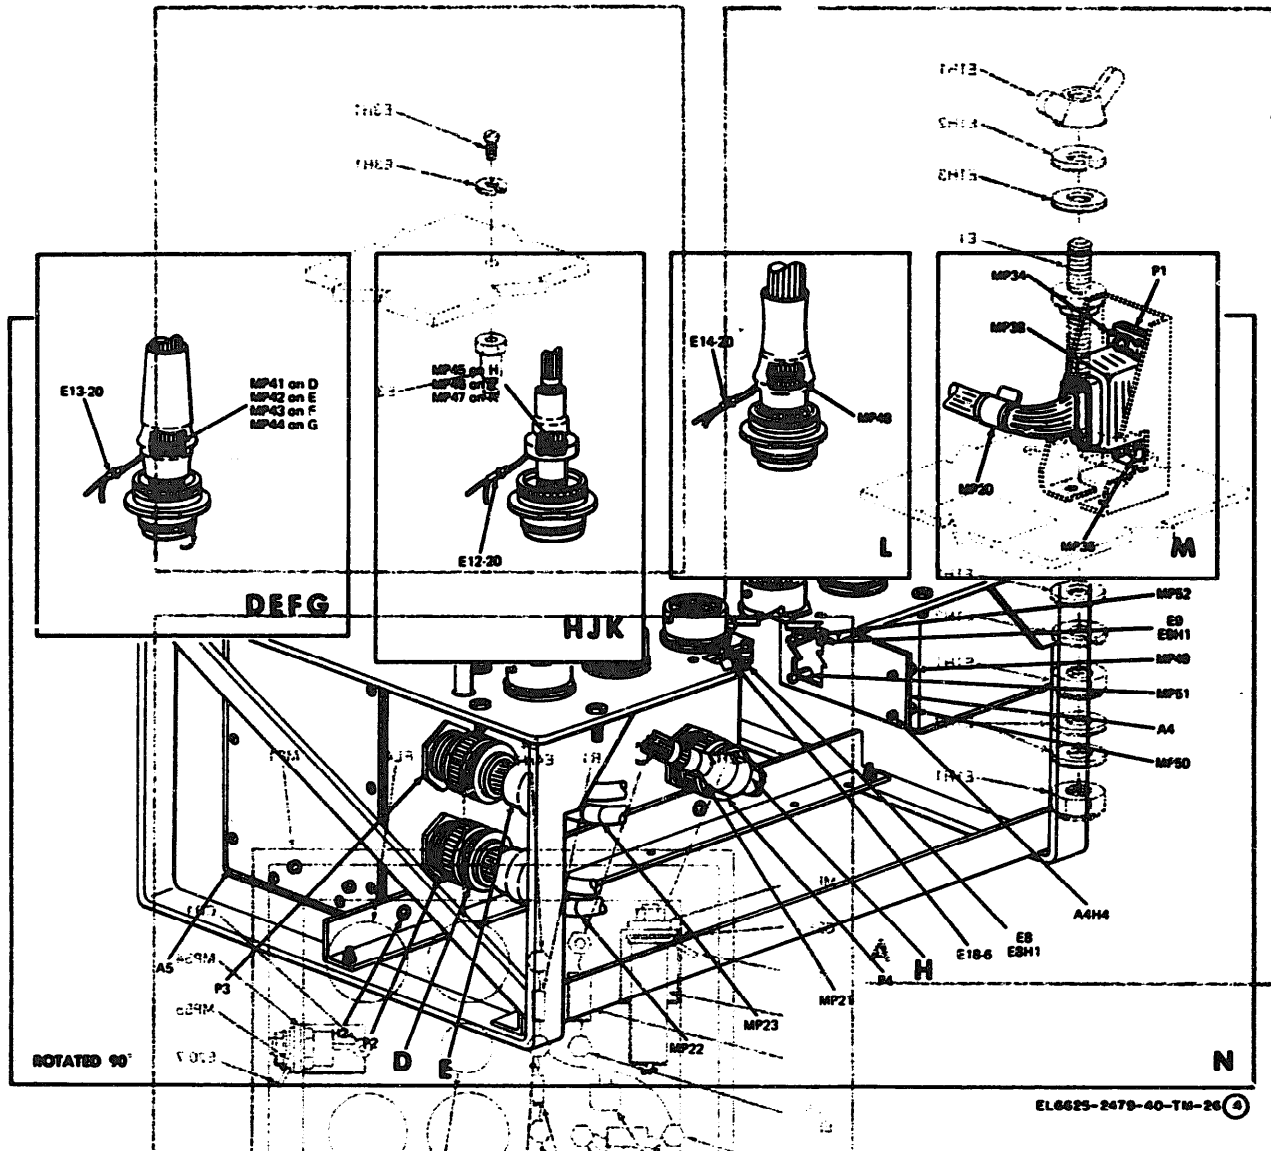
Panel assembly 1A3, parts location (parts 4 of 5).
